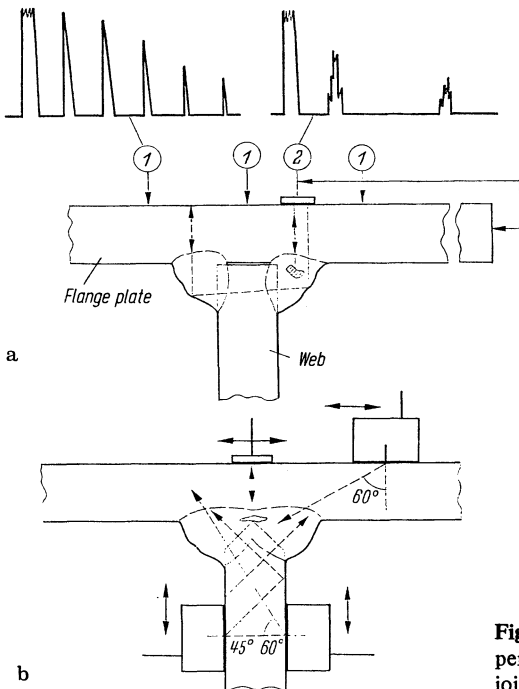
Testing fillet welds. a Joint not penetrated; b joint fully penetrated (K joint)
